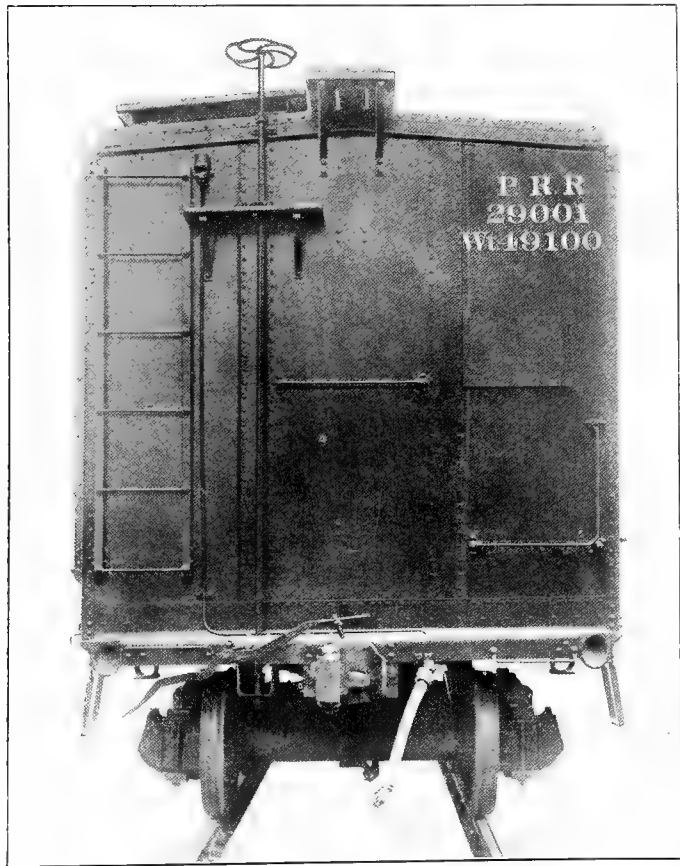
End Construction of Pennsylvania Railroad Steel Box Car Shown in Fig. 7.
